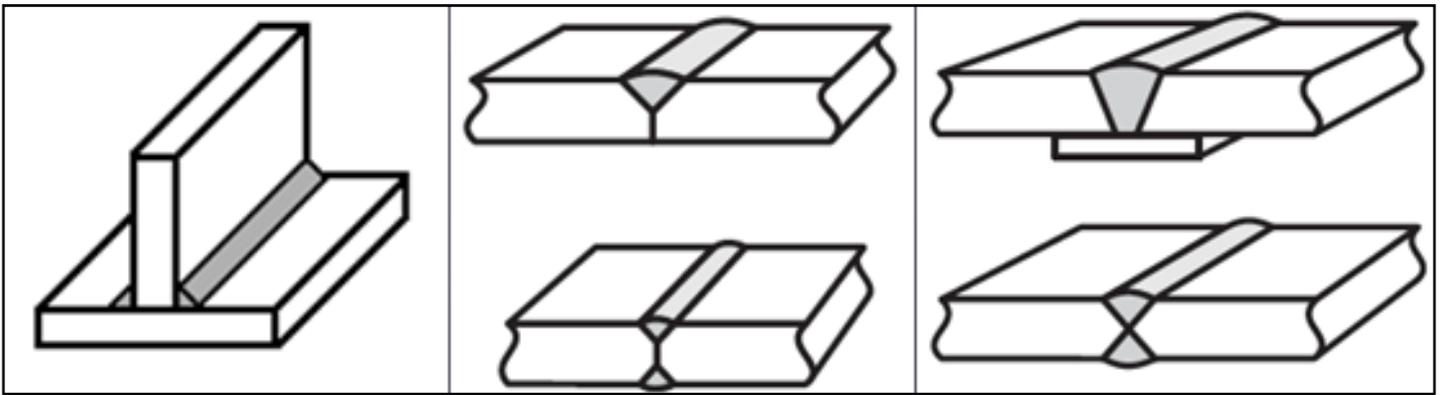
Fillet Weld, PJP Weld and CJP Weld.
